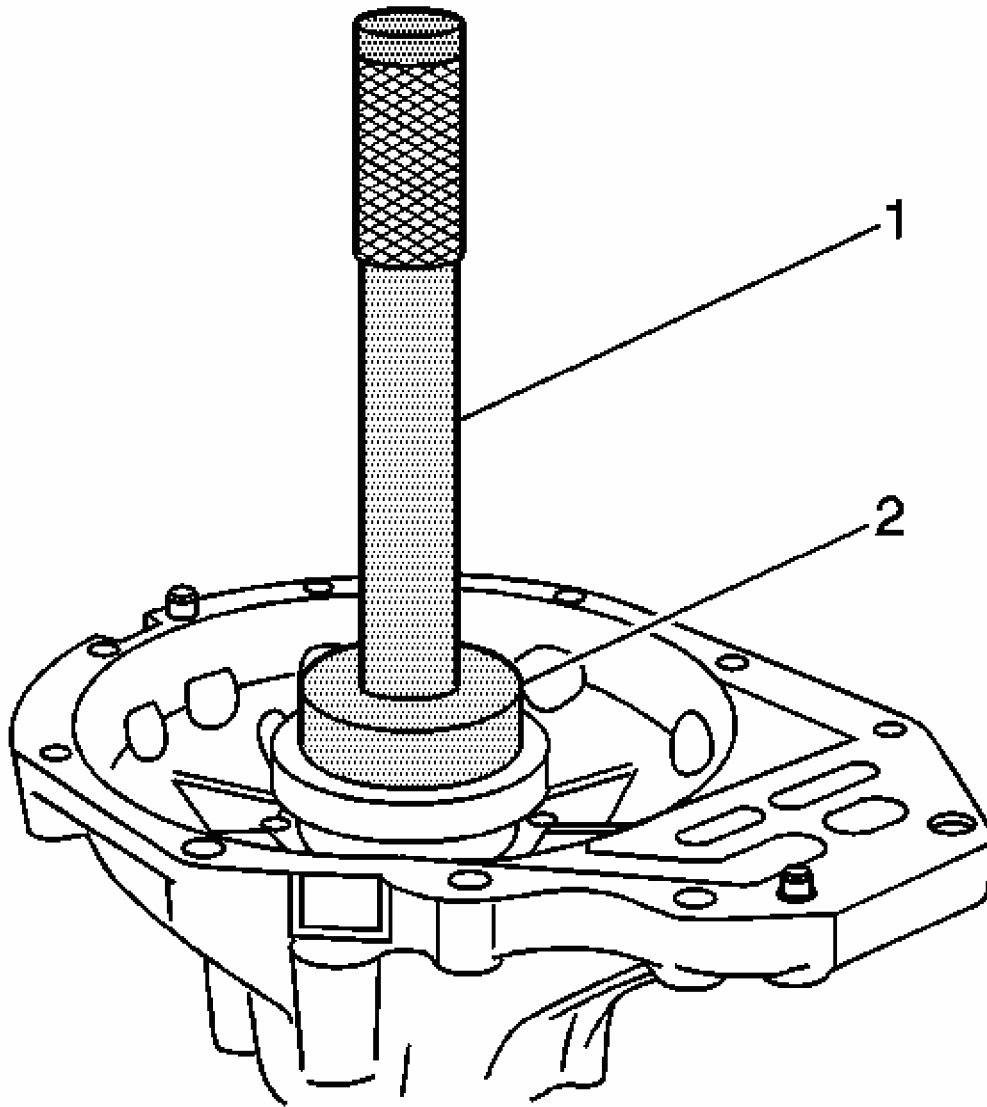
Installing Right Differential Bearing Adjuster Assembly & Right Differential Case Side Bearing Cup
